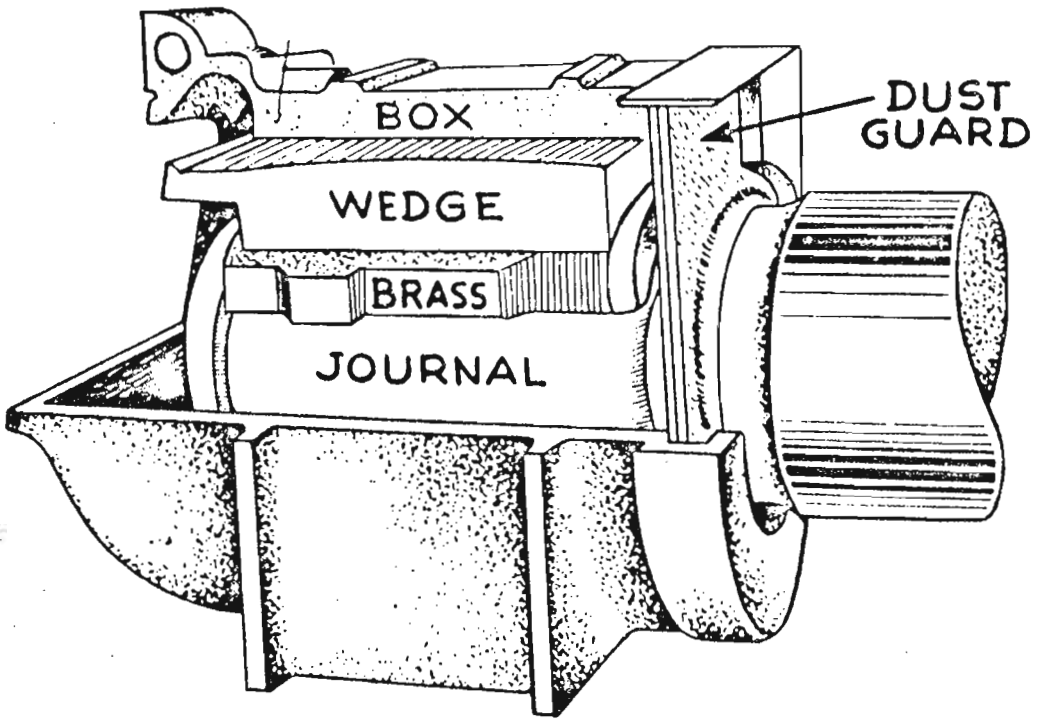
Cut Away View of A.A.R. Journal and Box Assembly.
